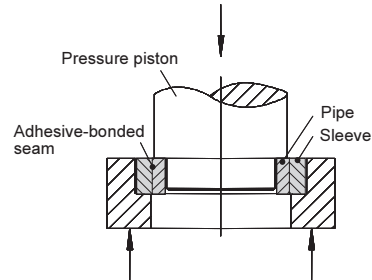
Shear test according to DIN 16970. The shearing of an adhesive-bonded pipe-sleeve joint or of similarly adhesive-bonded components is tested with the pressure beam of a test machine or on a press.
